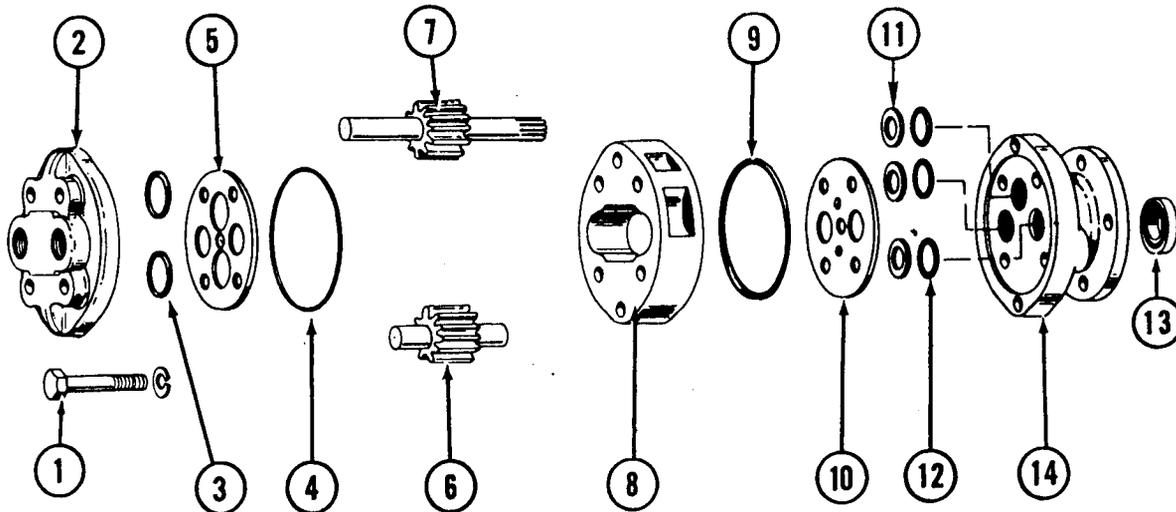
CONVERTER PUMP DISASSEMBLY
